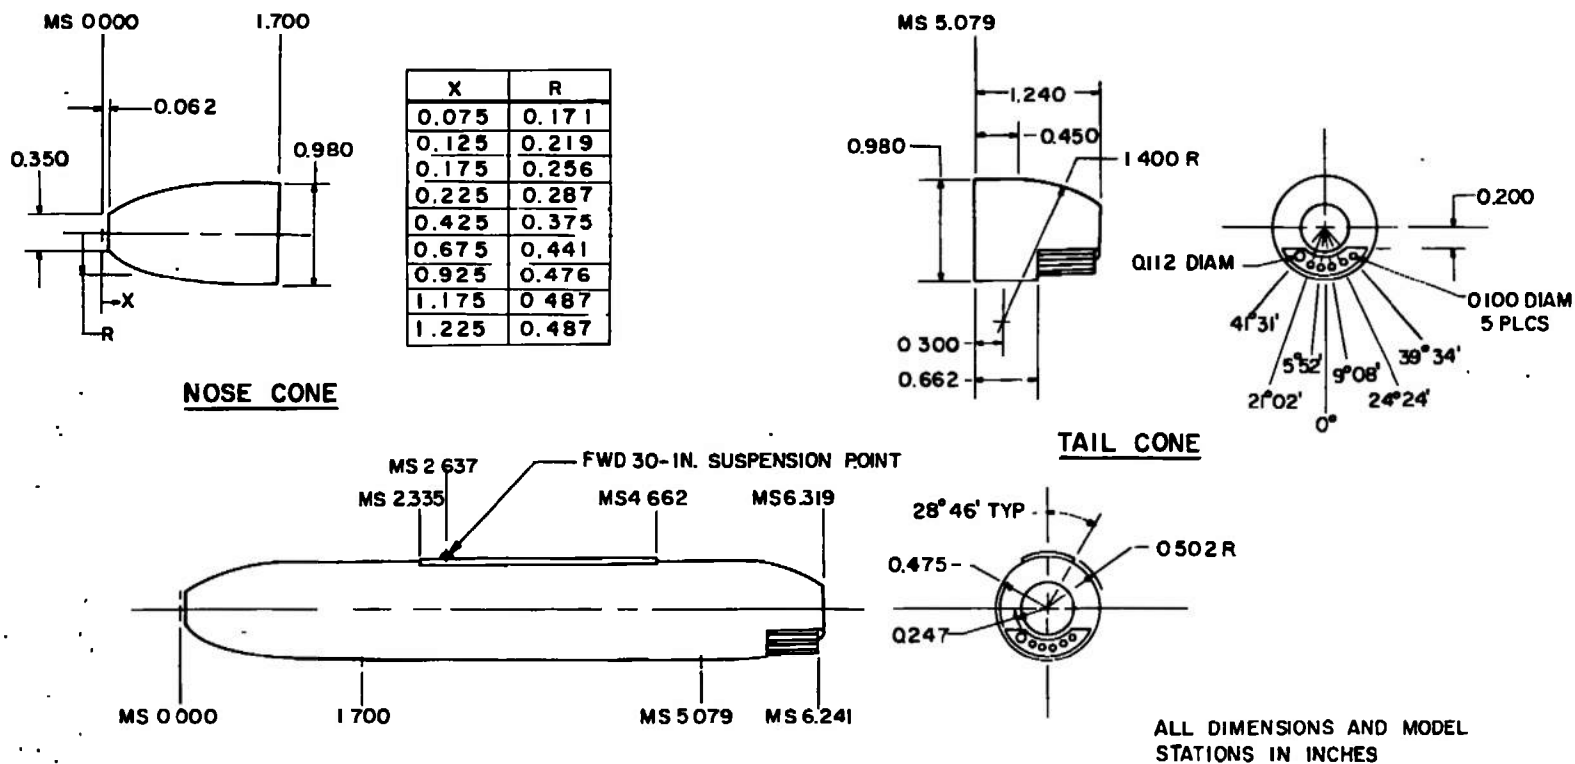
Dimensional Sketch of the ALE-38 Chaff Dispenser
